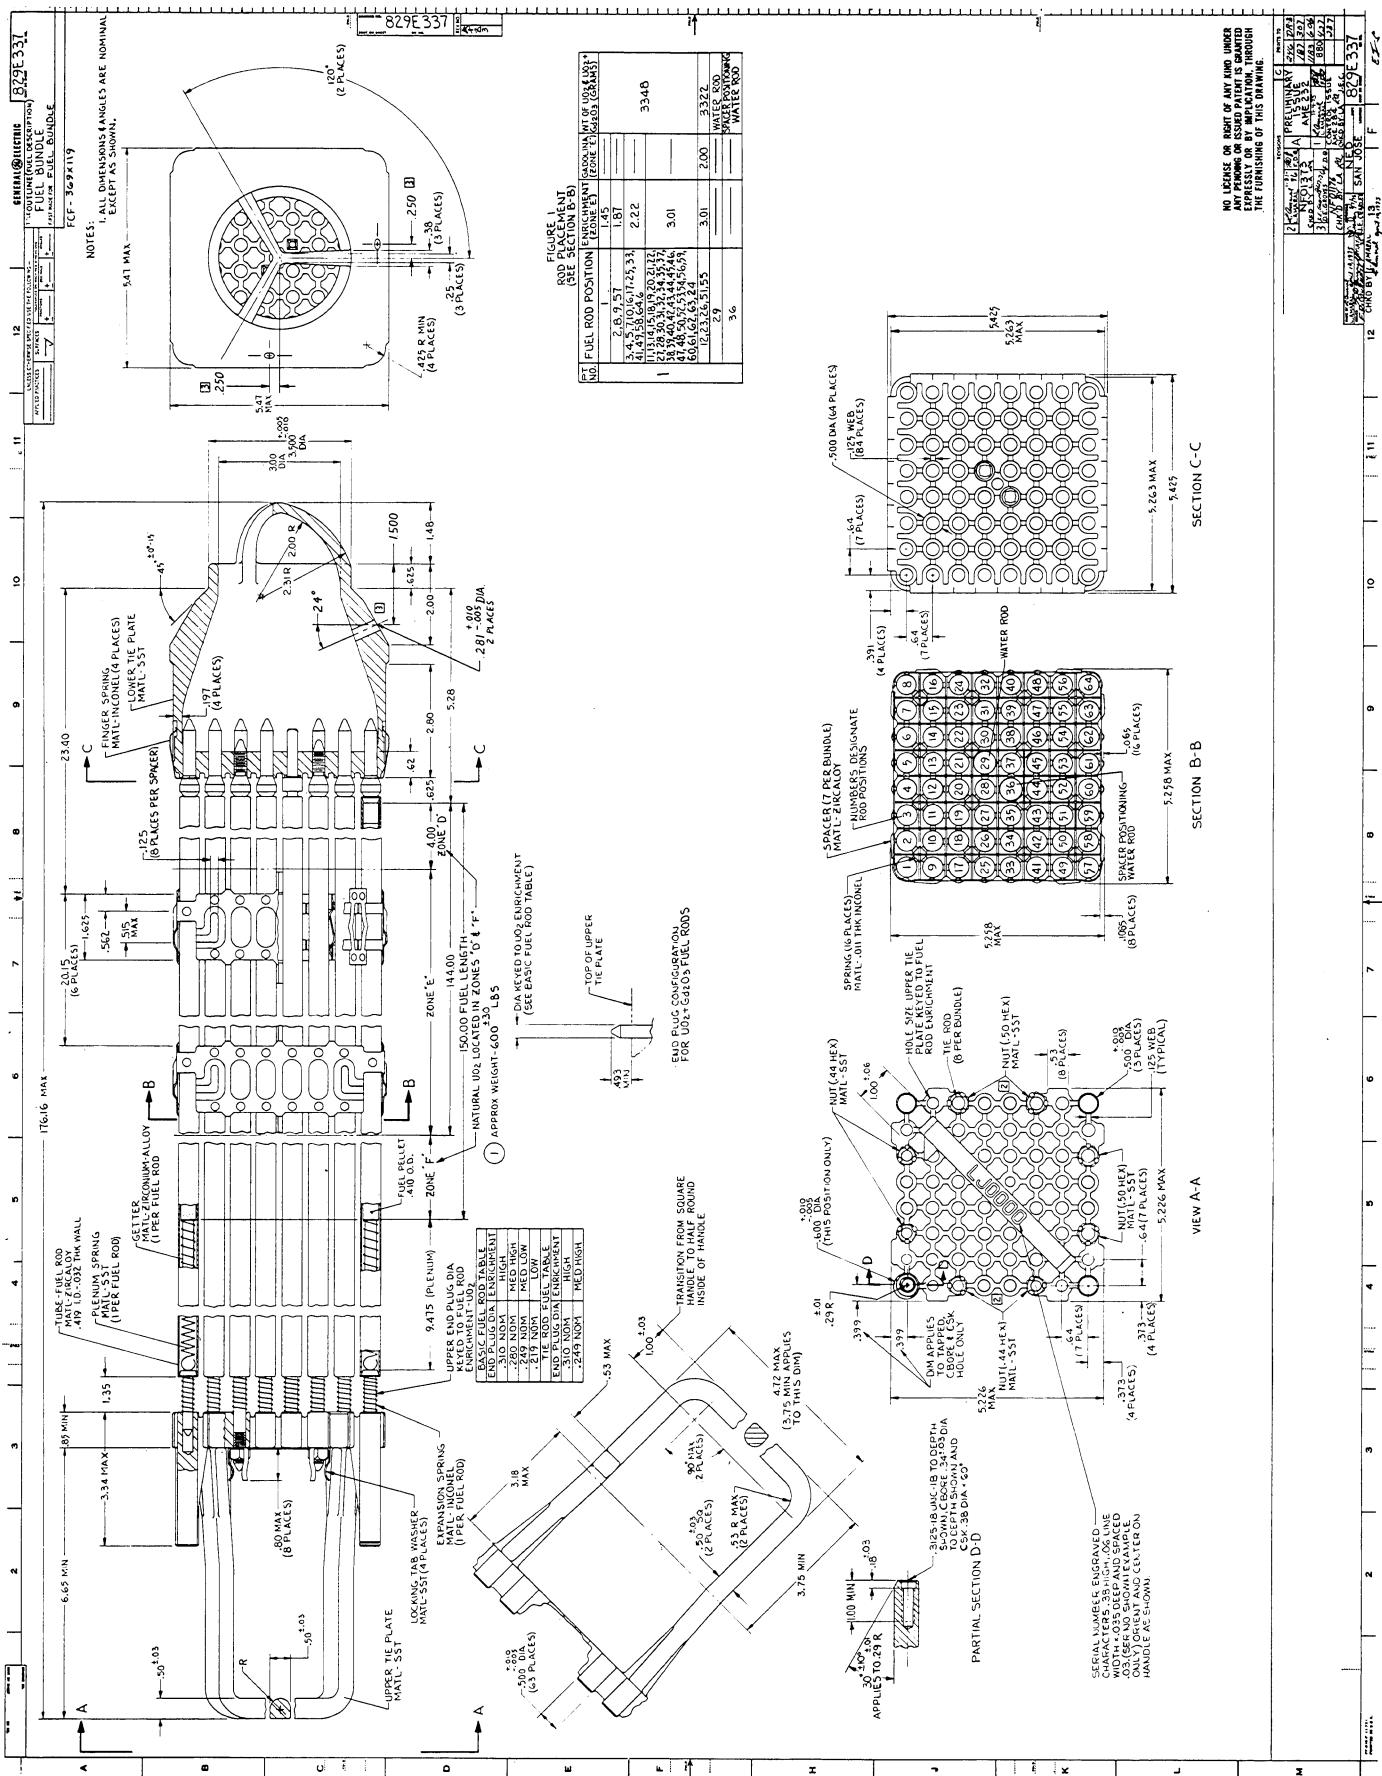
Fuel Assembly Drawing for LTA Reload Fuel
